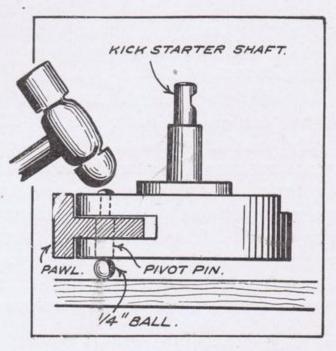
RIVETING PIVOT PIN FOR PAWL.
